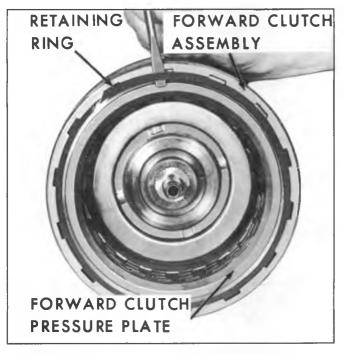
M--Removing Forward Clutch Retaining Ring and Pressure Plate
